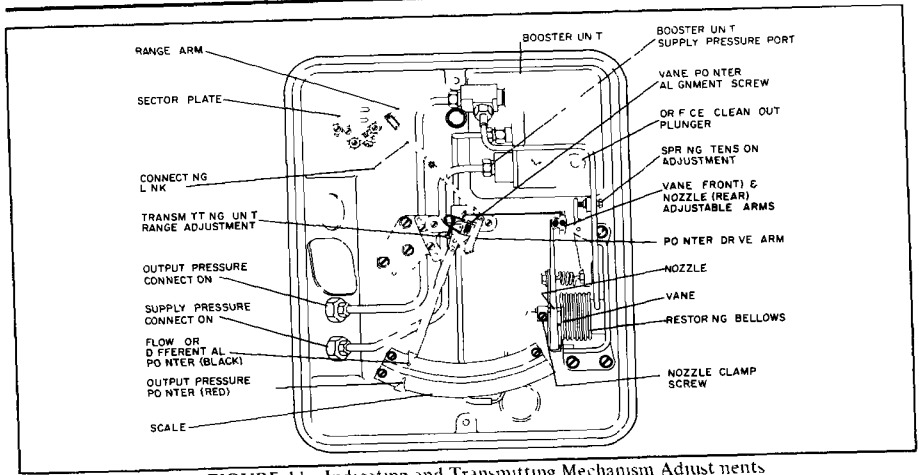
Indicating and Transmitting Mechanism Adjustments
